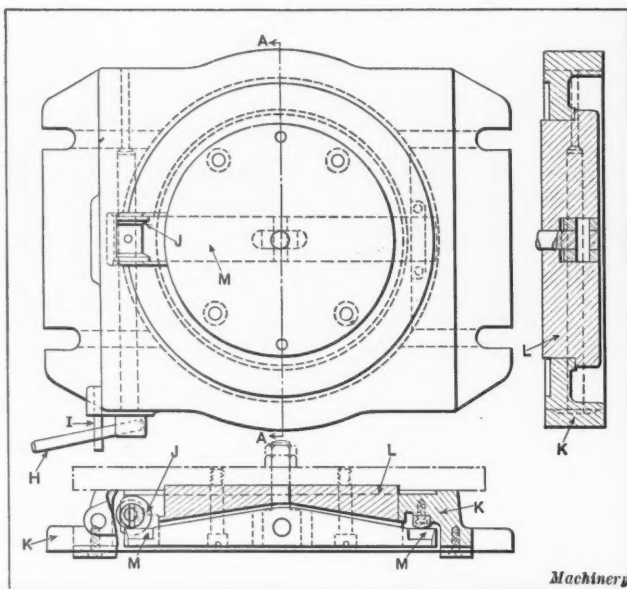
Plan and Cross-sectional Views of the Standard Type of Indexing Milling Fixture used by the Studebaker Corporation, also shown in the Illustration Fig. 3
